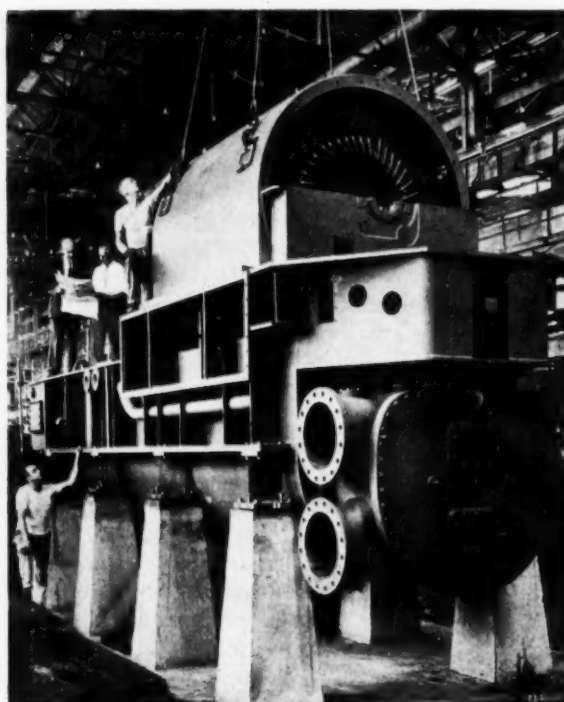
End view of the turbine-generator showing the method of mounting on the condenser shell
